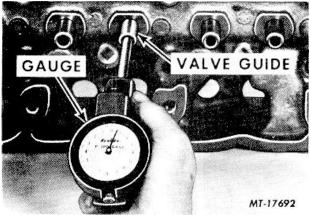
Checking Valve Guide Bore Using SE-2506 Gauge
